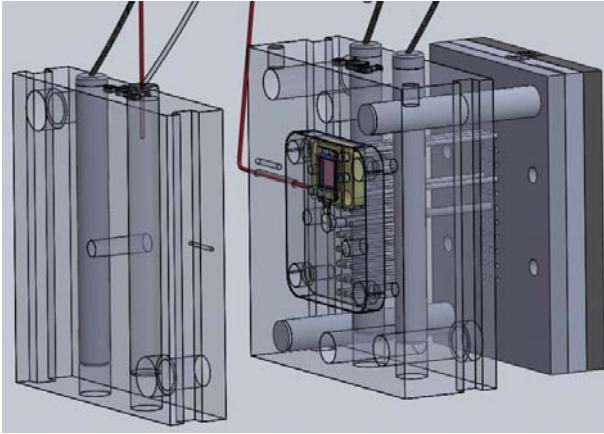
Full mold assembly schematic. The red rods are wire thermocouples.
